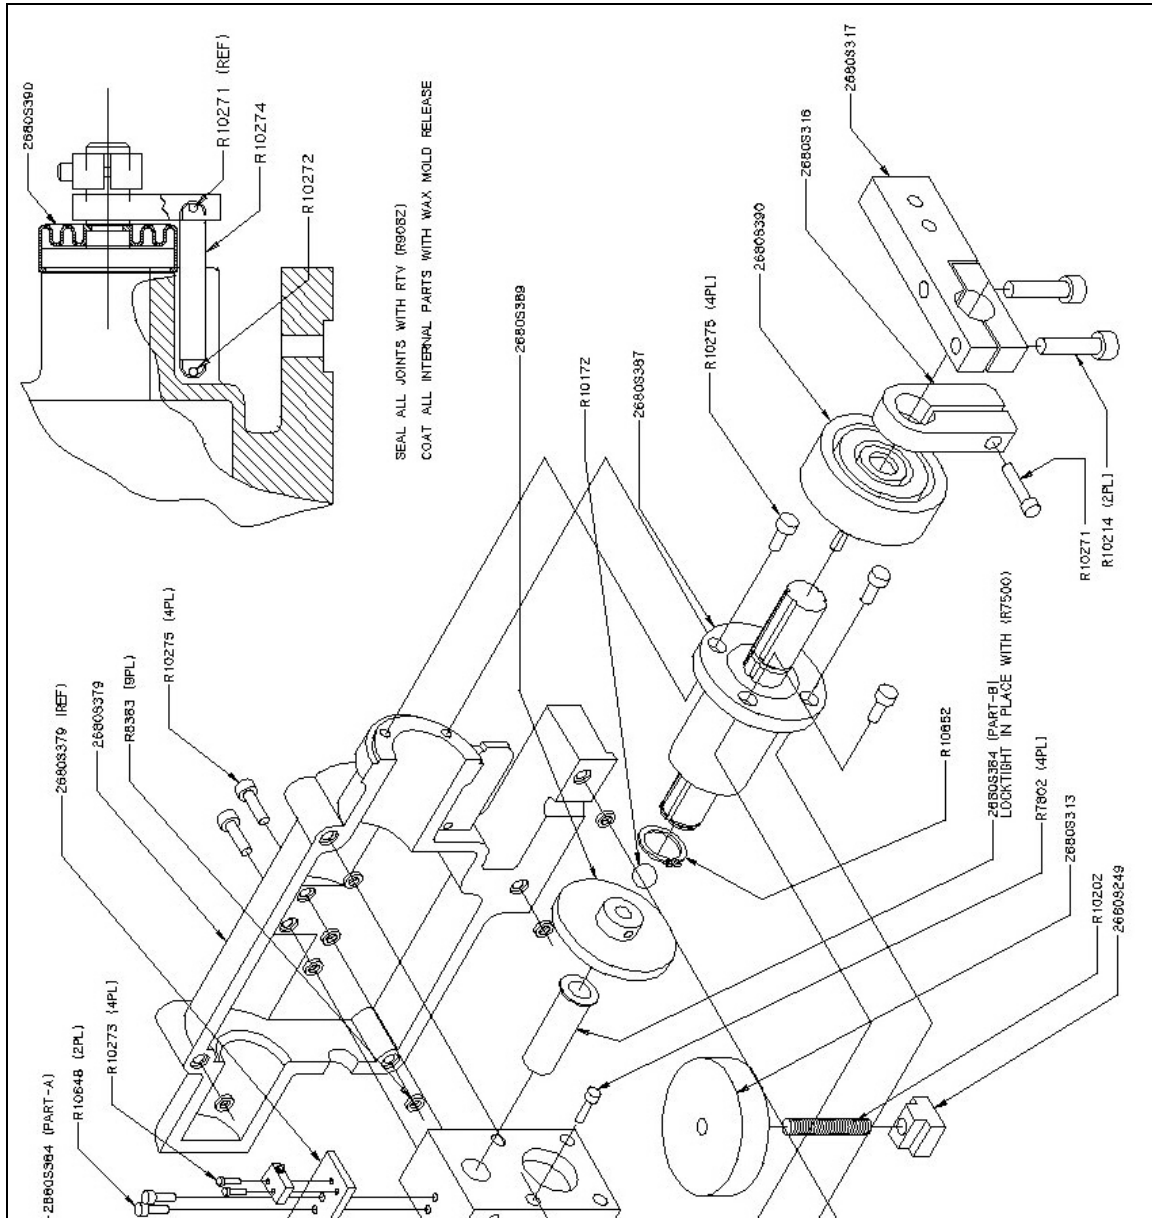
X-Table Assembly Diagram (11-2750) Part A
